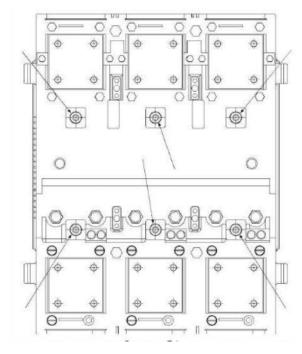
Locations of the $^3/_{8}\text{-16x}$ $^7/_{16}$ -inch deep screw inserts for mounting the breaker in equipment, 2500-3000 A back-connected frames.
